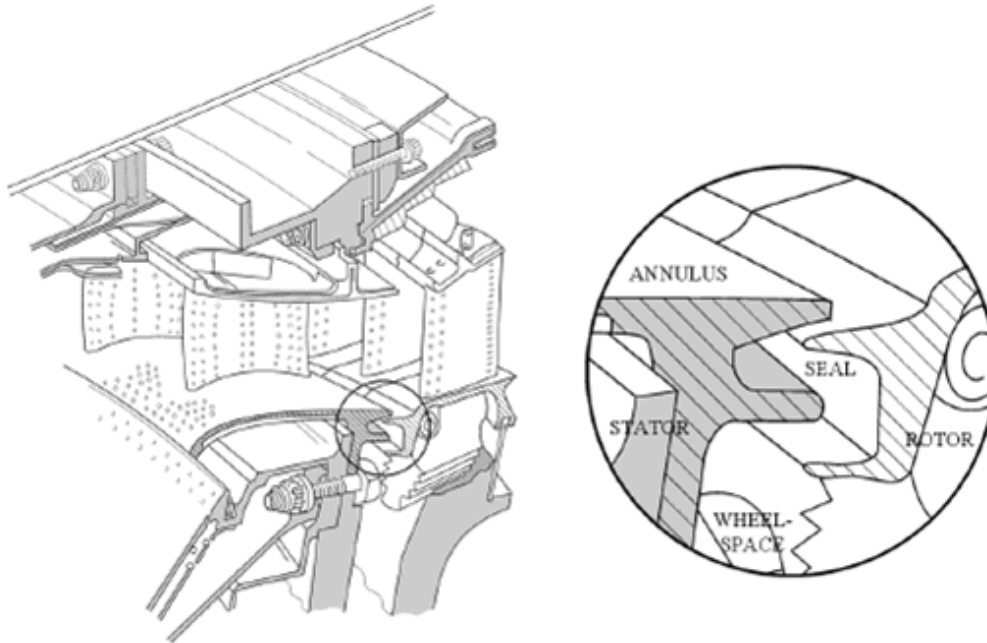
Generic rotor-stator turbine stage and double clearance-seal inset [6-7]
